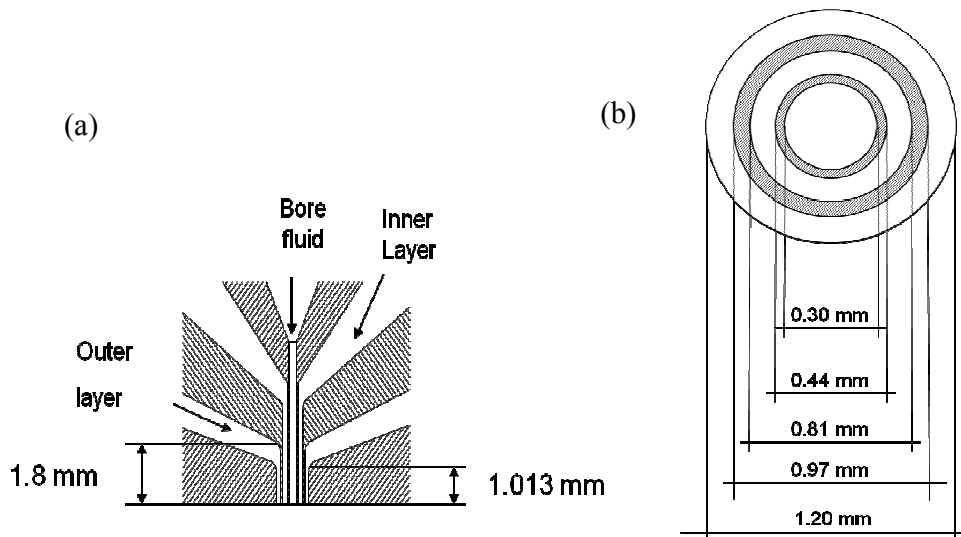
(a) Side view and (b) cross sectional view of a dual-layer hollow fiber spinneret
